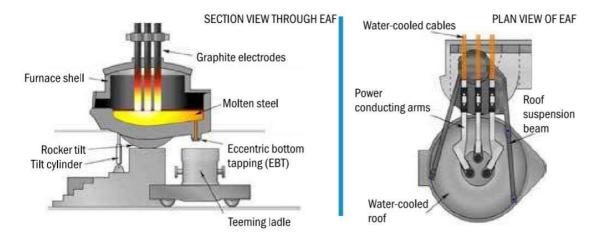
Electric arc furnace - section and plan view (source: steeluniversity.org)
